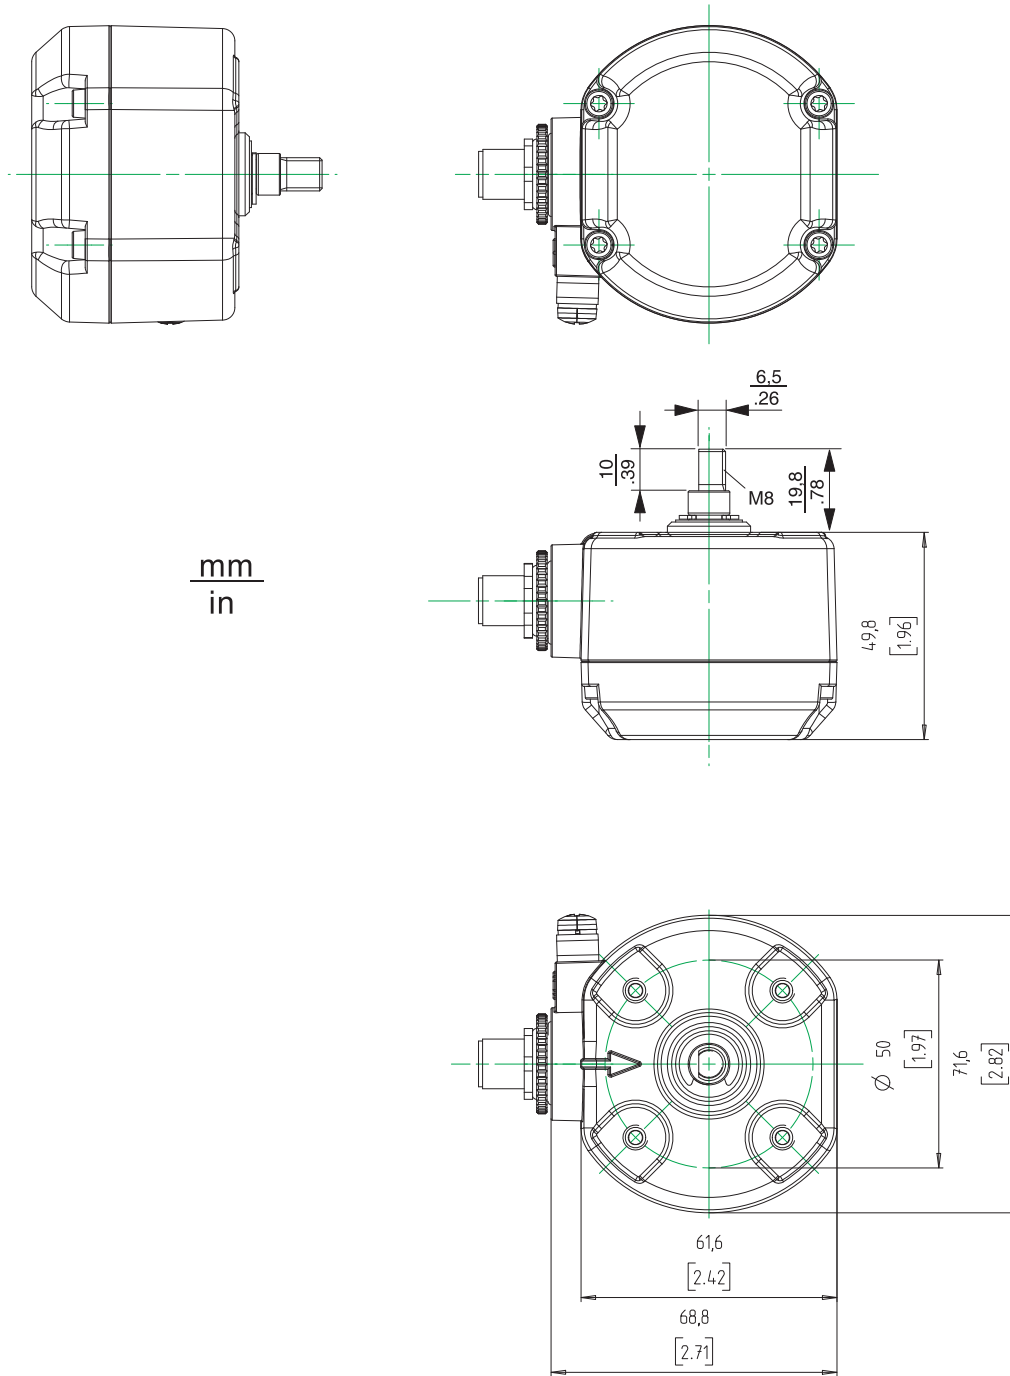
DIMENSIONS FOR SIDE MOUNTING, CODE V
